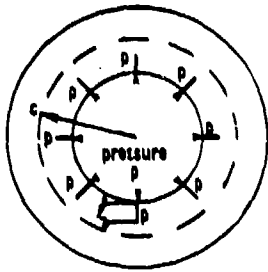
Internally cracked, autofrettaged thick cylinder - pressure in bore and cracks.
